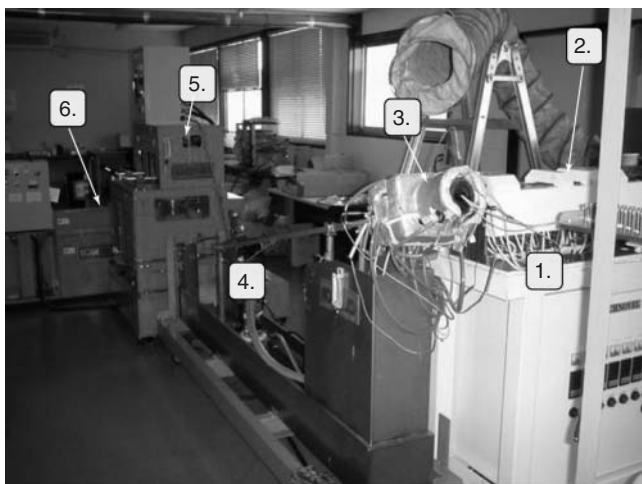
Photograph of the trial production system for LFP manufacture. (1) Roving stand, (2) twin screw extruder, (3) impregnation die head, (4) cooler, (5) puller, and (6) pelletizer.
